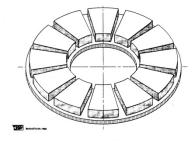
Rotor magnet plate with 12 magnet poles
